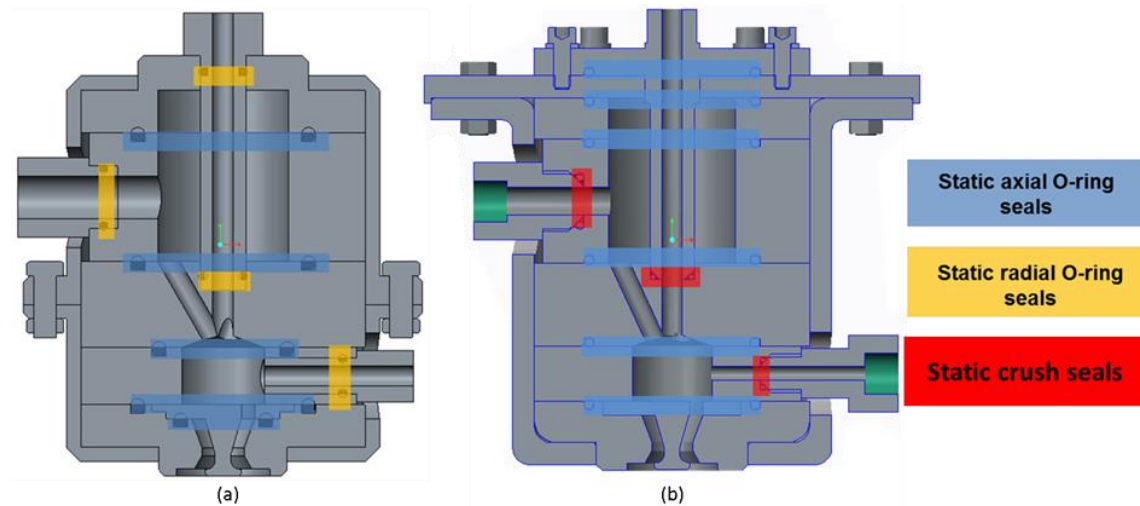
Updates of sealing mechanism and housing design in the nozzle design
